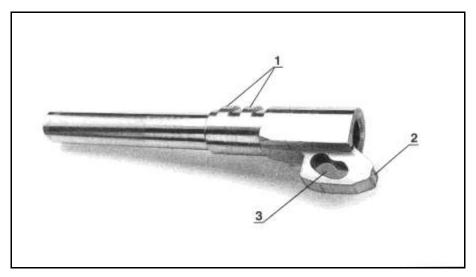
Barrel: 1 – interlocking lugs; 2 – cartridge up-slide; 3 – locking cam
